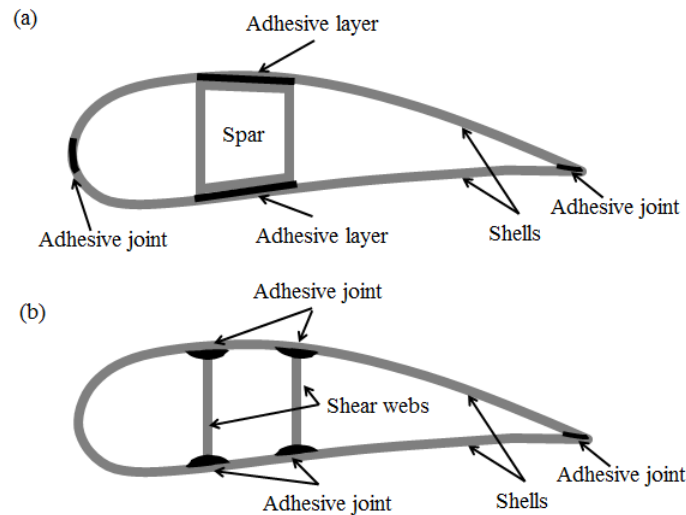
Adhesive joints at the various sections of the blade: (a) one-piece construction, (b) two-piece construction
